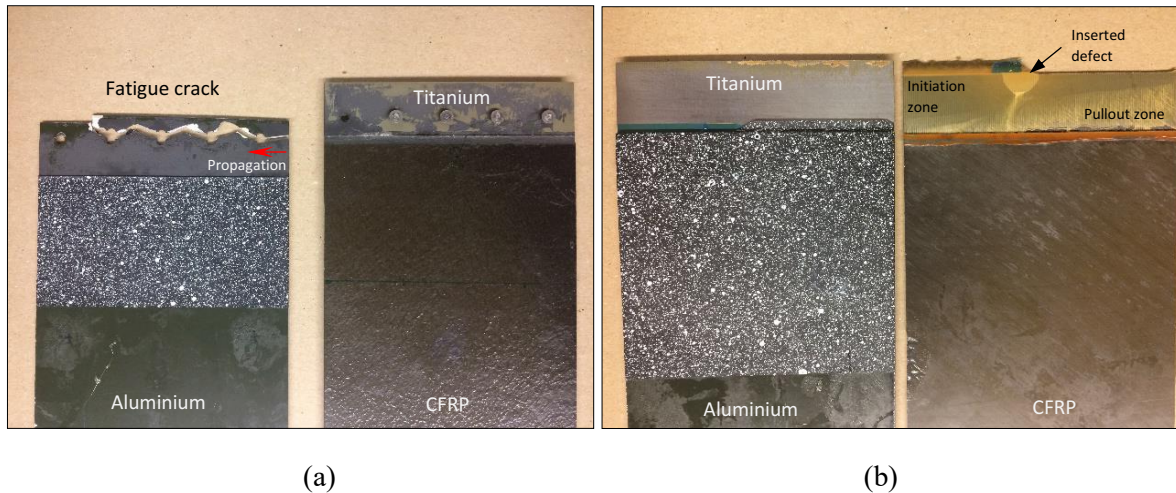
Failure modes: (a) fatigue crack in NDJ and (b) surface disbond in WDJ.
